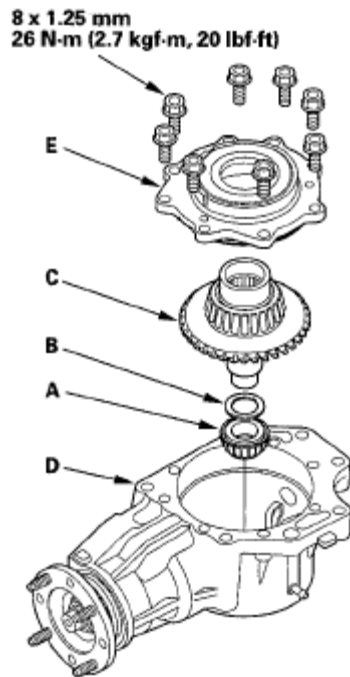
Identifying Tapered Roller Bearing, Thrust Shim And Transfer Hypoid Drive Gear/Shaft Assembly With Torque Specifications
